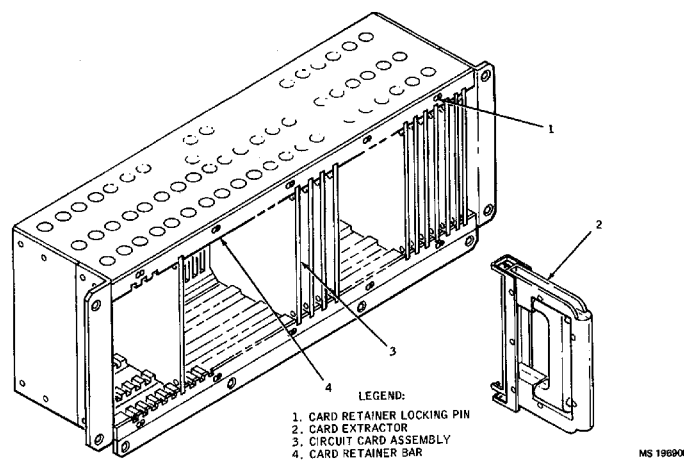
Circuit Card Assembly, Removal and Replacement
